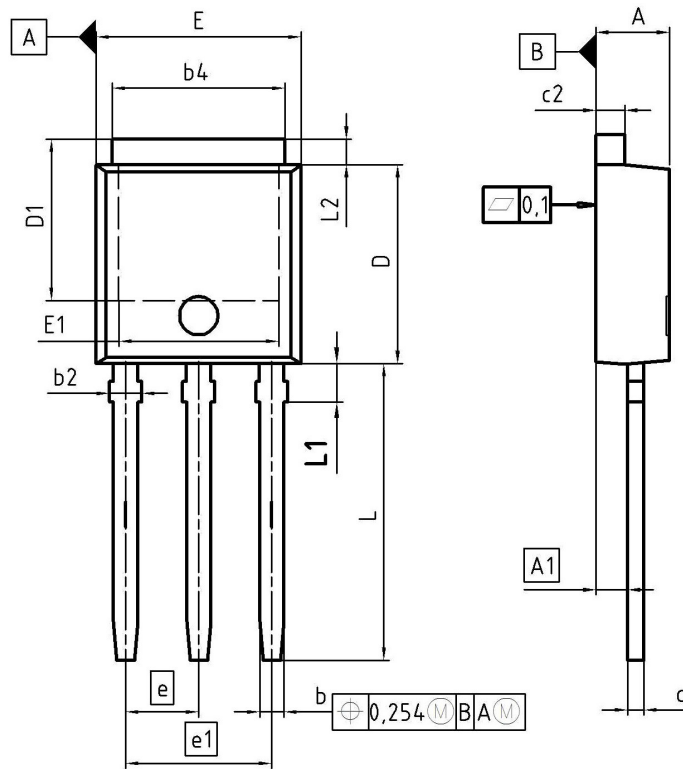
Outline PG-TO 252, dimensions in mm/inches
